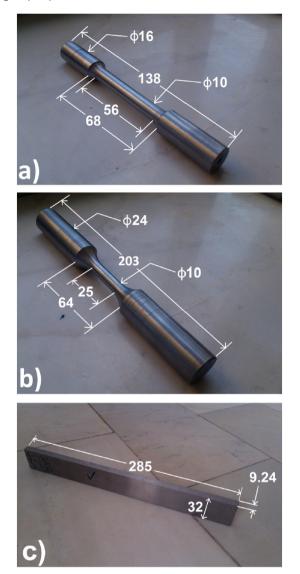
Test samples, (a) tensile test specimen, (b) cyclic test specimen, (c) four-point bending test sample, all dimensions are in mm.
